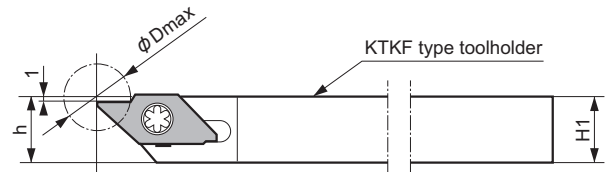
When a TKF-AS insert is attached (The cutting edge is 1 mm lower than the center line.)
